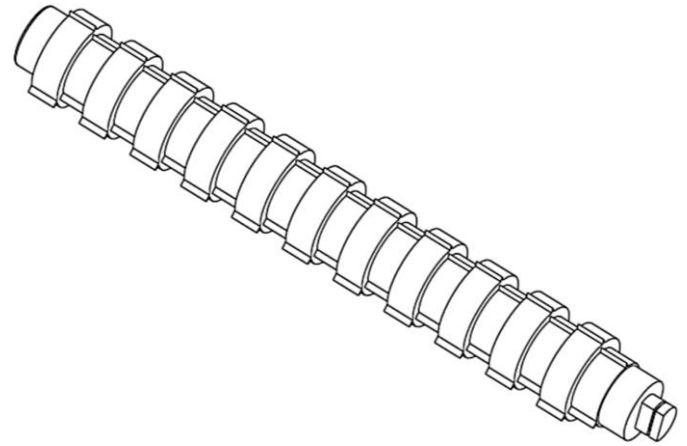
Isometric view of the 20mm chinchin cutting shaft
